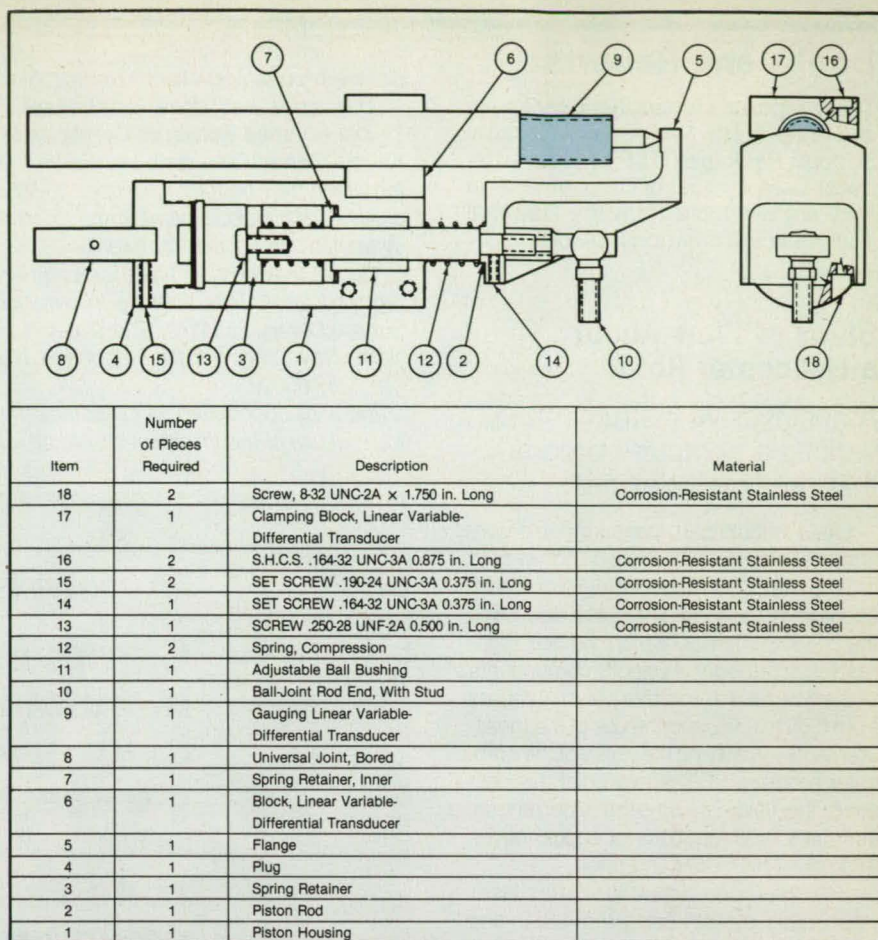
This Simplified Assembly Drawing shows the parts of each of the six identical pistons.
